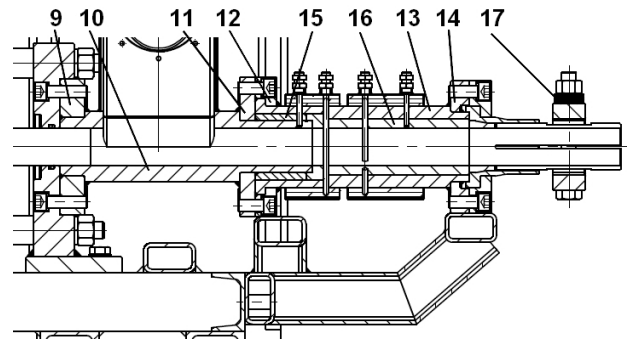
Pressing chamber of experimental pressing chamber in sectional view (9 – flange 1; 10 – body of the pressing chamber; 11 – flange 2; 12 – flange 3; 13 – body of the socket; 14 – flange 4; 15 – tube spacers; 16 – calibration chamber; 17 – disc springs)
